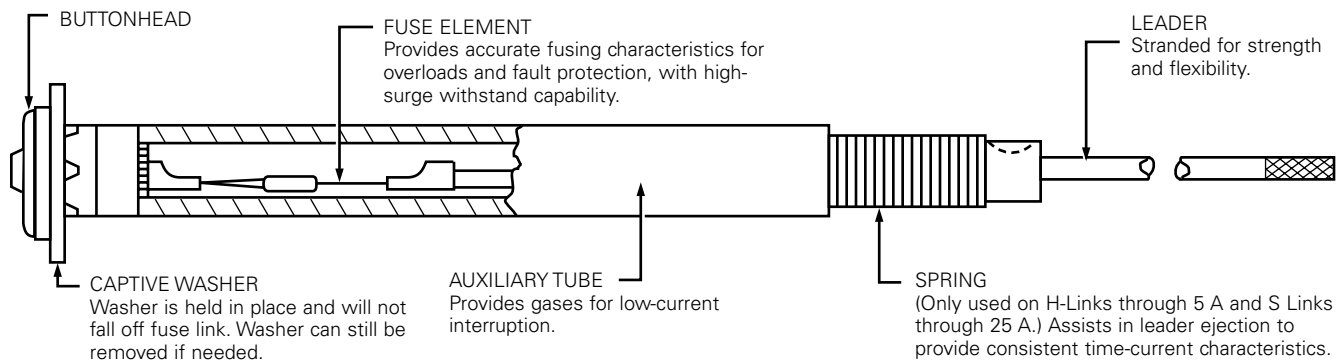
Typical Type D, S, and H (1 A through 5 A) fuse link construction.
